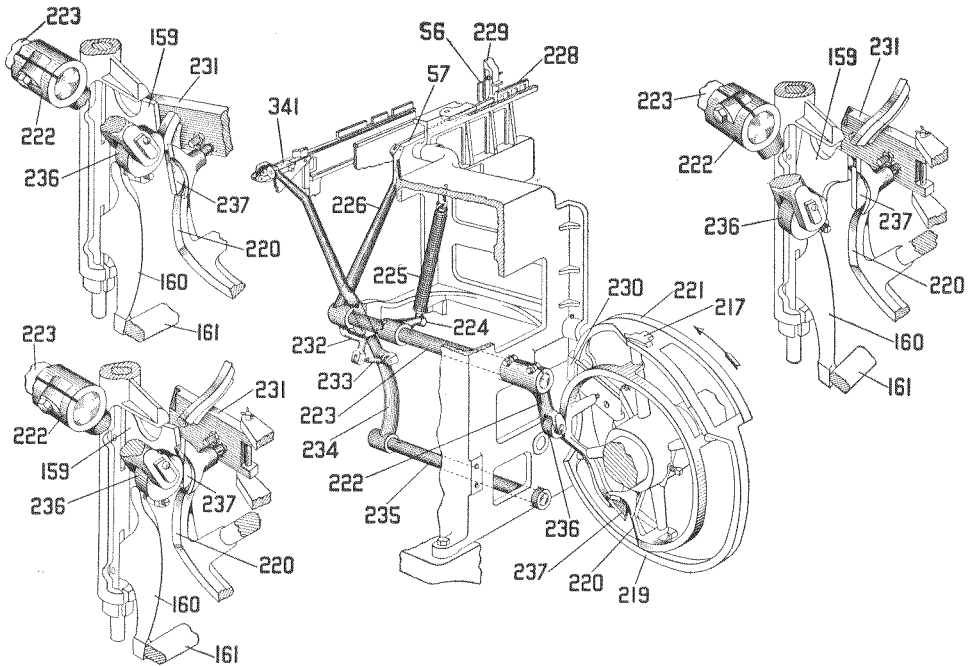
View showing line-delivery cam, starting and stopping cam, and elevator-transfer cam. These cams, while they work separately, are in one casting.
